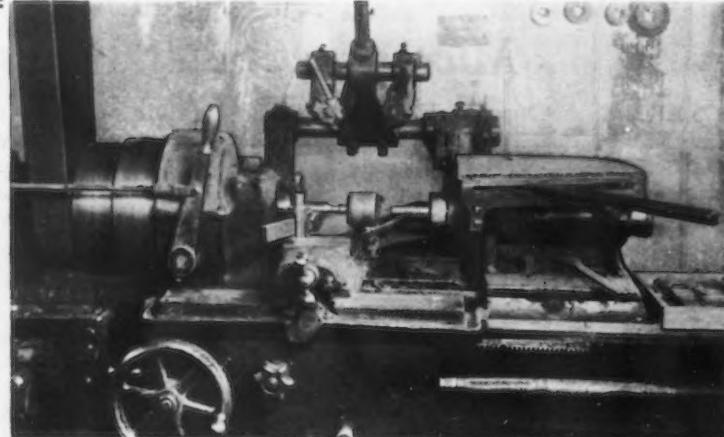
(Above)—A special tailstock has been constructed for a Chard lathe, the sliding sleeve being operated by a self-locking toggle lever.
